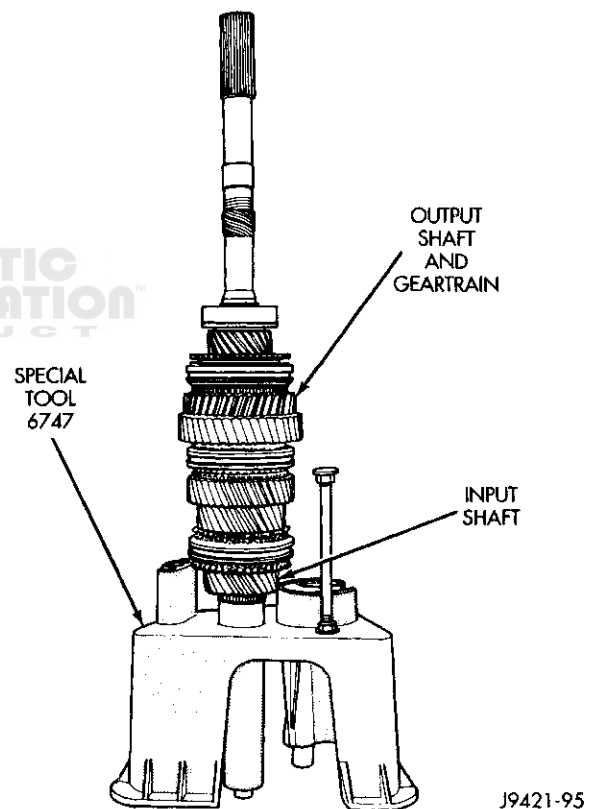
Output Shaft And Geartrain Installed In Input Shaft
